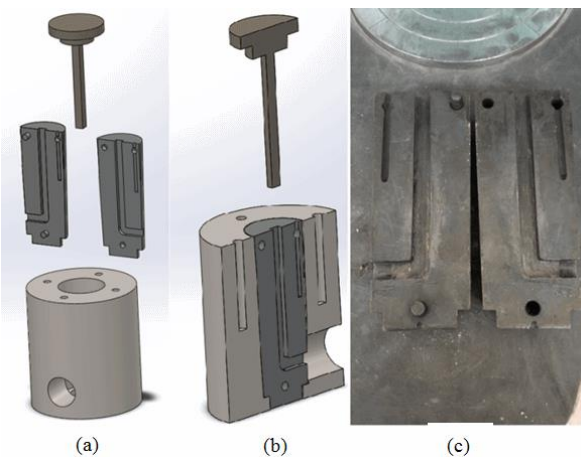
(a) Schematic view of die parts (b) cross section of assembled die (c) Cone shape parts of the die
